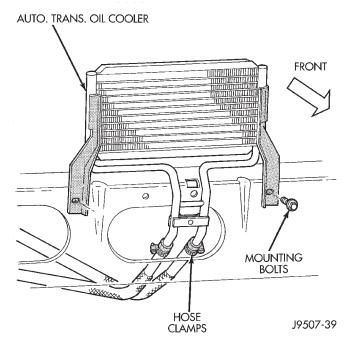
Auxiliary Air-To-Oil Cooler—XJ Models—2.5L Engine
